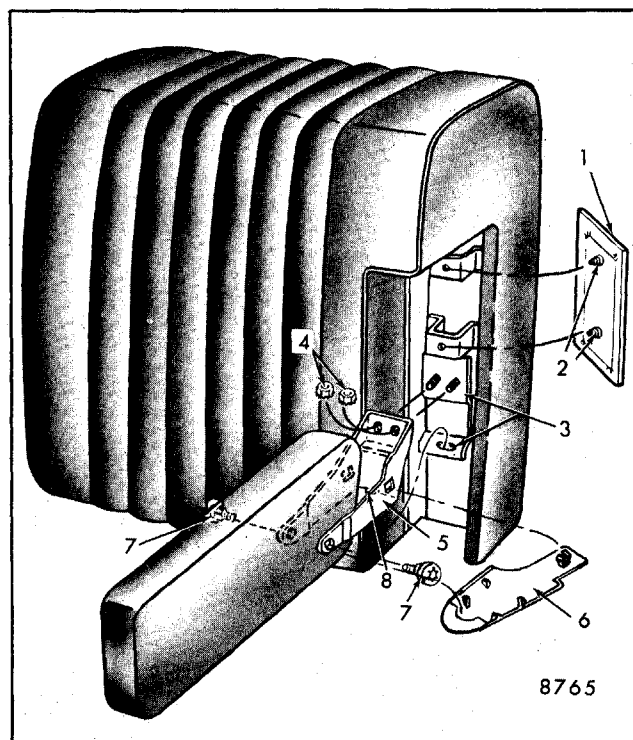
Passenger and Driver Seat Back Center Armrest Installation - Cadillac "K" Style
